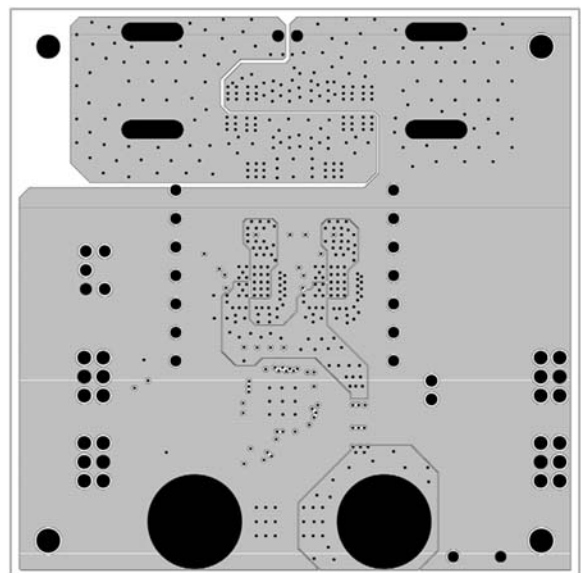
PCB - INNER LAYER 2 (TOP VIEW)
